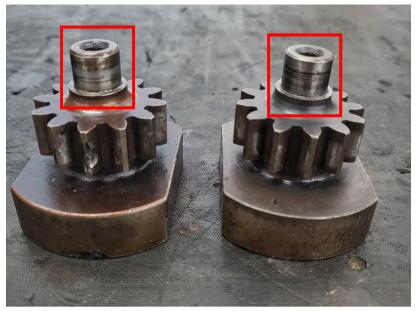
The left and right magneto drive gear shaft indicating wear on the shaft.
